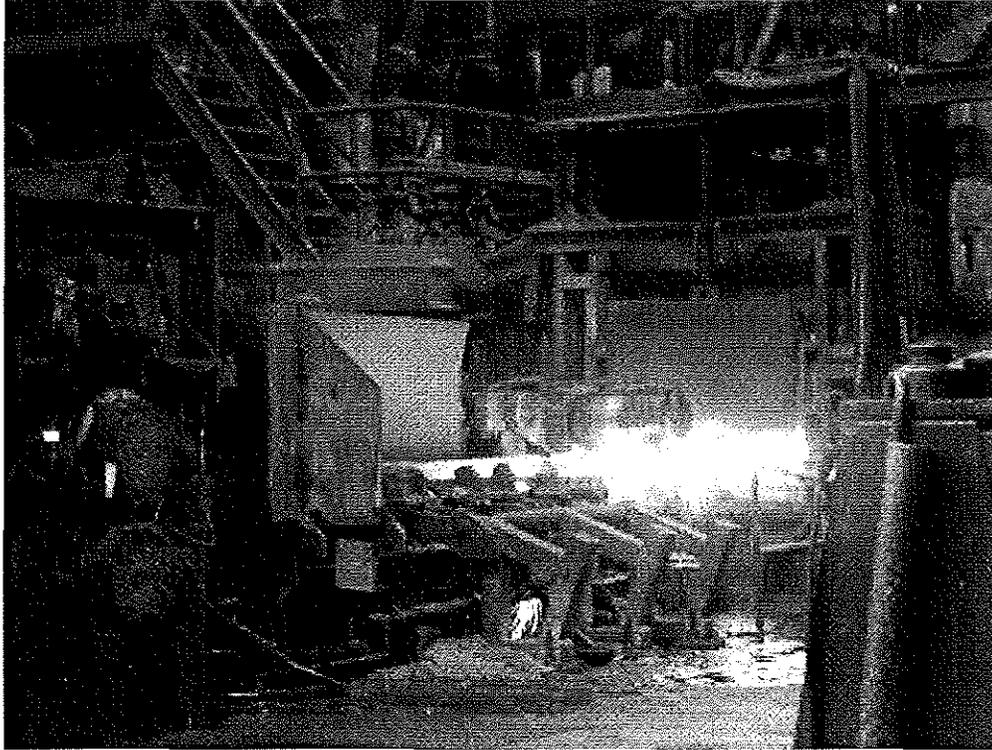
(DSC00096) : Photo of reheated billet beginning the milling process
